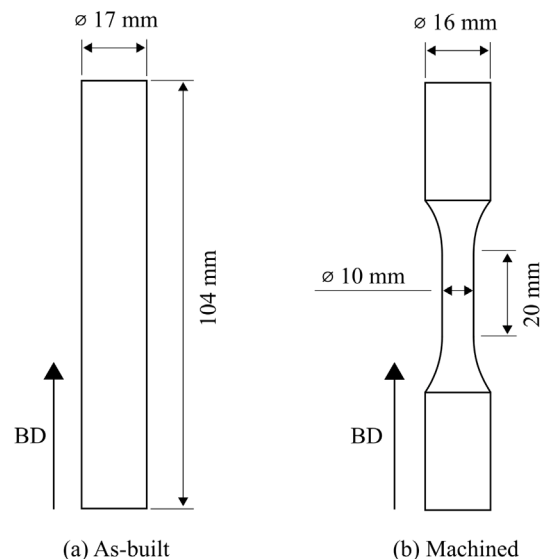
Technical drawing for (a) the as-built specimens after the AM process and (b) the specimens after machining. The build direction is marked for the AM specimens; the conventionally manufactured specimens were machined to the same dimensions.
